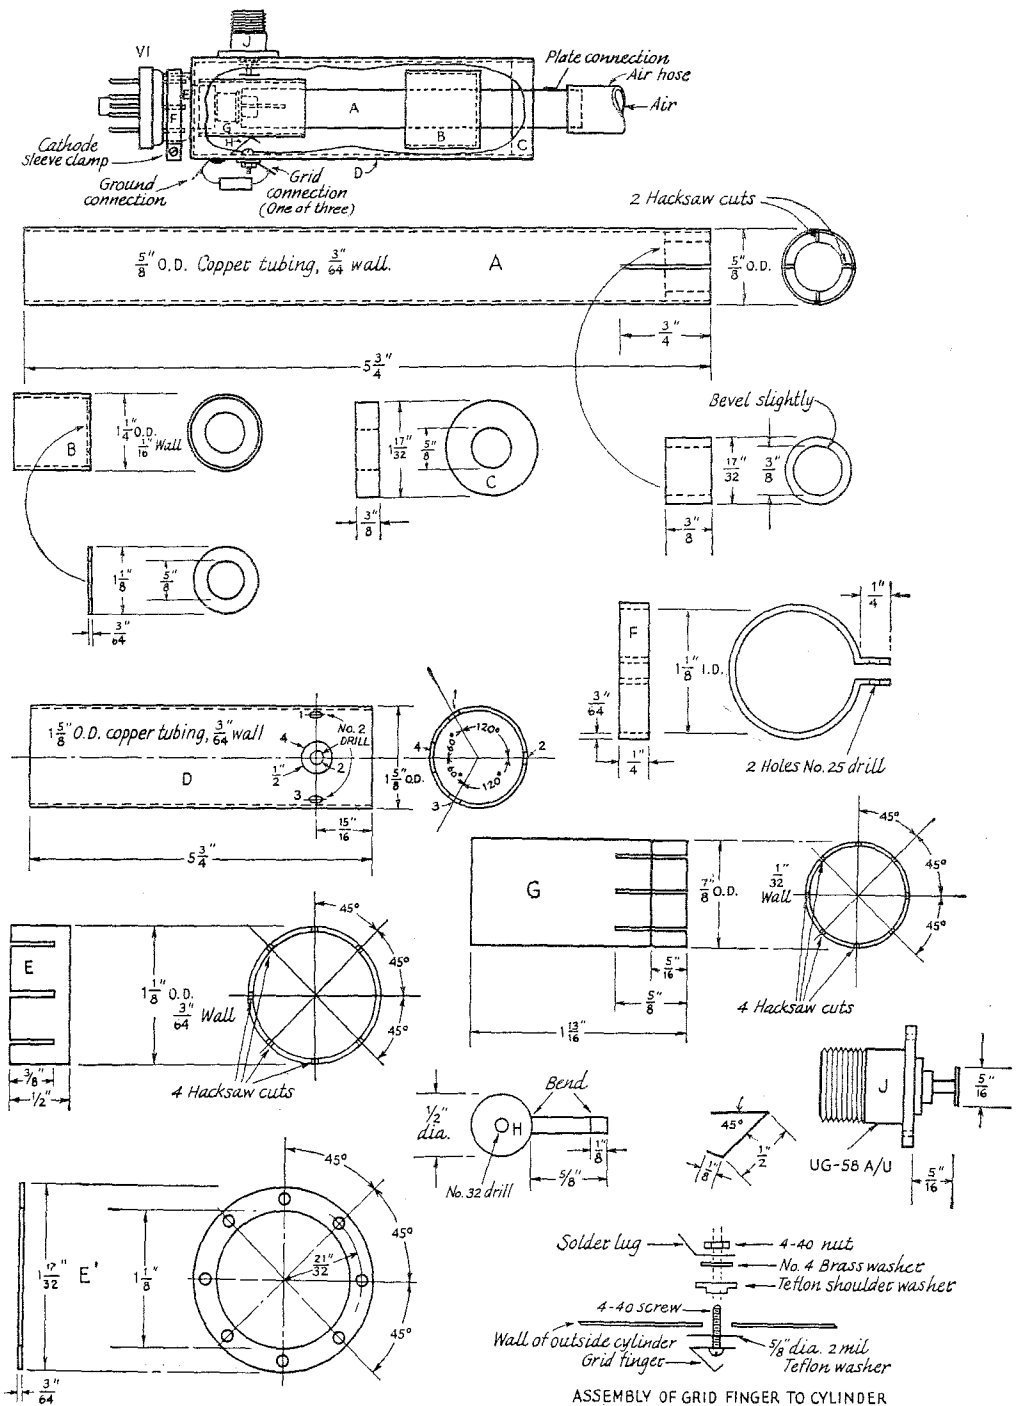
Cut-away drawing of parts of the pulsed oscillator. A—plate line and contact; B—plate choke assembly, 1 1/4 inches long; C—plate line insulator; D—outside cylinder; E—cathode sleeve; E'—cathode end disk; F—cathode sleeve clamp; G—grid cylinder; H—grid contact finger (3 required); J—output probe (modified UG58A/U receptacle with thin disk attached). All parts except H and C are copper or brass. Cylinders are standard copper pipe diameters. H is thin beryllium copper.
